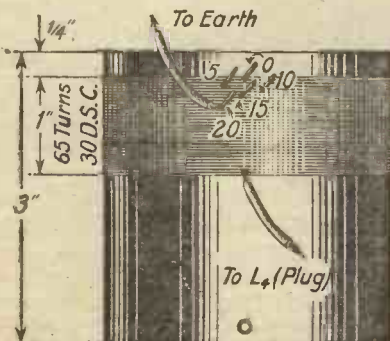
The coil  $L_1, L_2$  can be constructed from these measurements.
